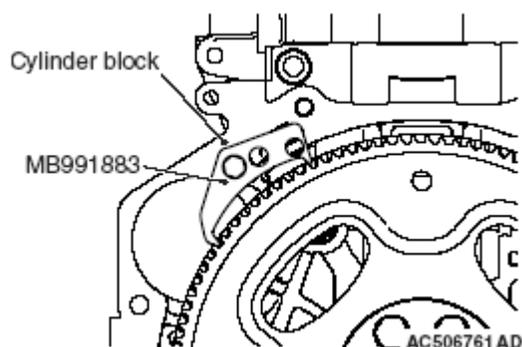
Identifying Special Tool MB991883 And Cylinder Block
